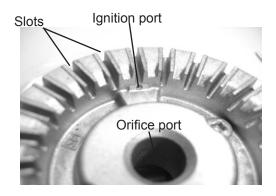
Cooktop burner head (All burners except Double ring burner)
